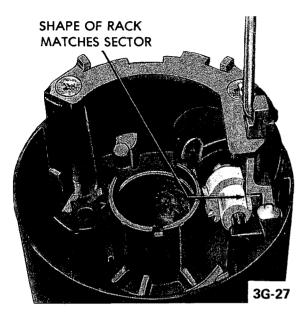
G-93 - Rack and Lock Bolt Assembled to Sector
